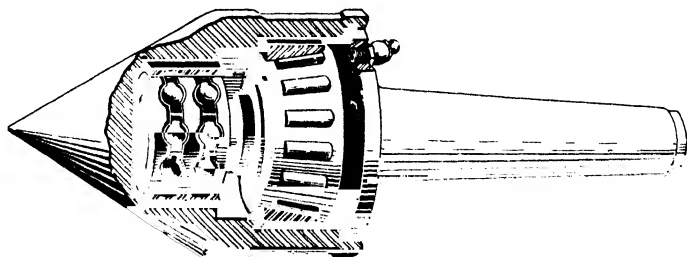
The "Live" Center for Use on Lathes Where Lengthening of the Workpiece Due to Expansion Is a Problem
